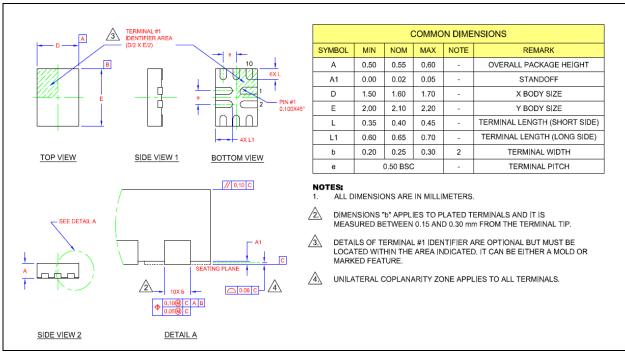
10 pin, 1.6mm x 2.1mm QFN Package Outline
